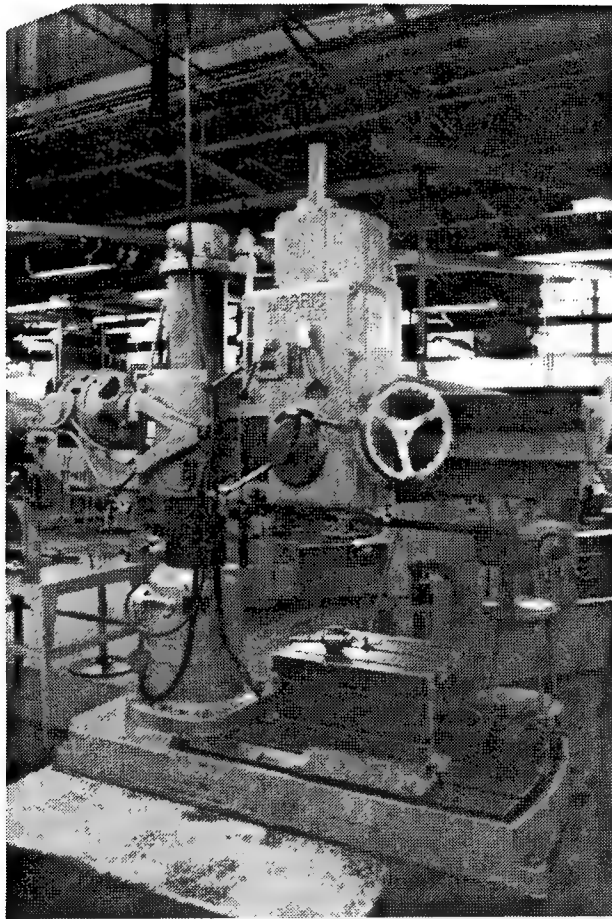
Building 3: Drill Press located in the Machine Shop Area of Building 3.
